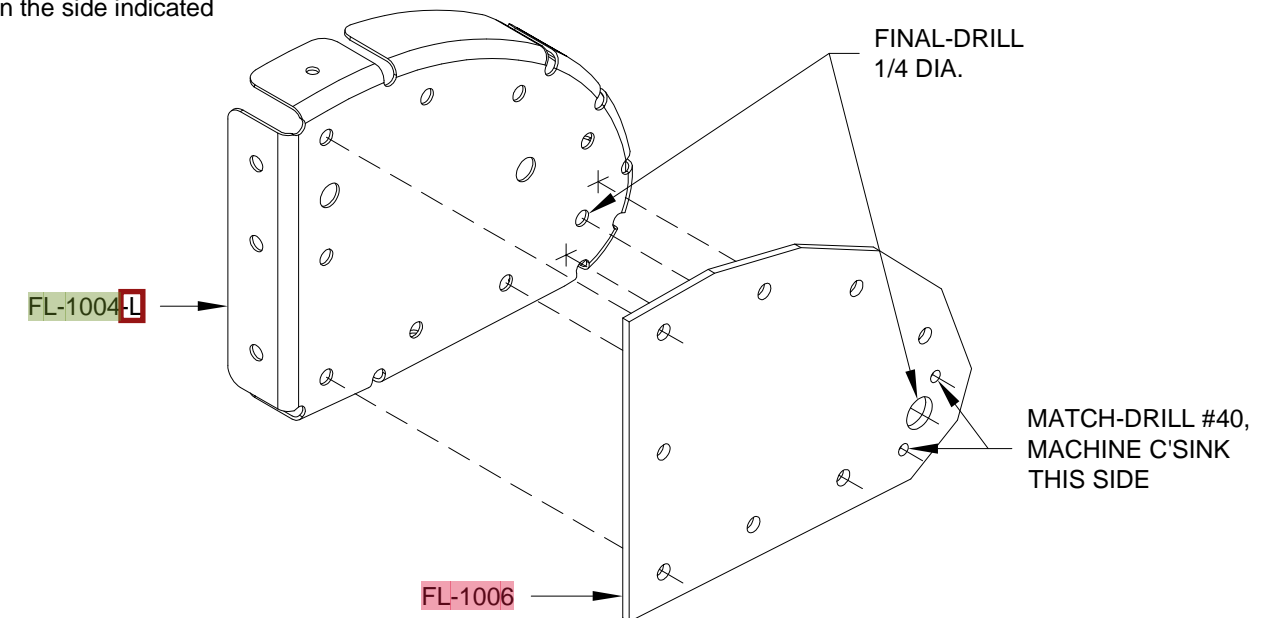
OUTBOARD ROD END RIB SUBASSEMBLY
